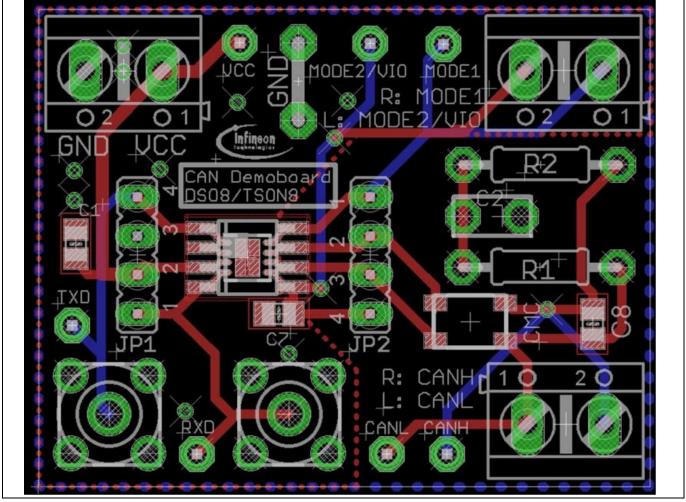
PCB layout of TLE925X demoboard (Top + Bottom)
